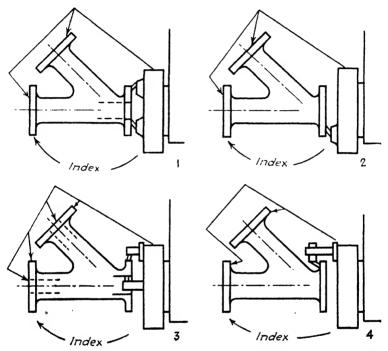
These four outlines show different operations on the Y casting. The work is indexed to permit the cutting tool to reach all the flanges.
